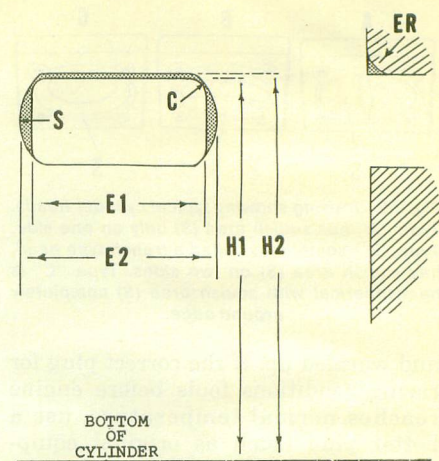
Raising the exhaust port in cylinder will cause port to open sooner. If port modifications are incorrect, rings will probably catch and cause extensive damage. Radius (S) at sides and rounded edge (ER) guide rings back into grooves.
